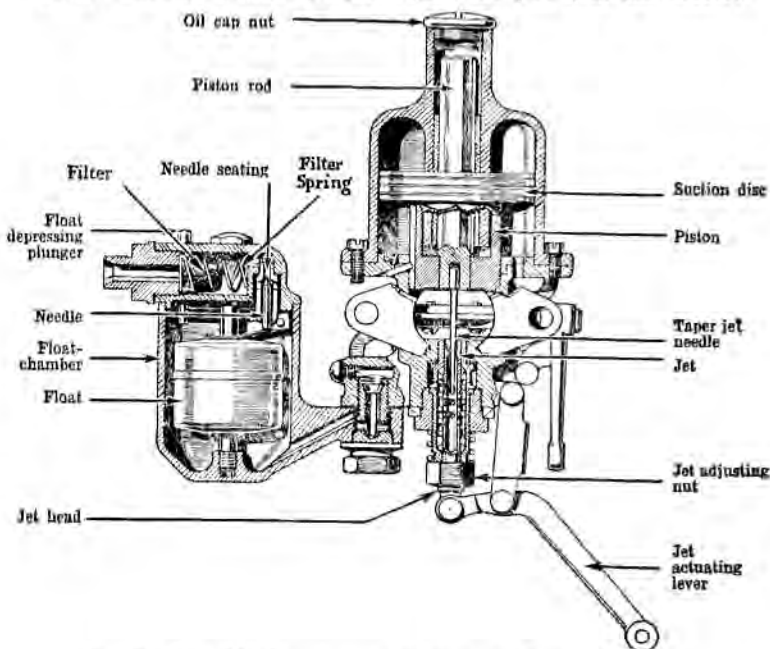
THE S.U. CARBURETTOR IN SECTION, CLEARLY SHOWING ITS INTERNAL CONSTRUCTION
